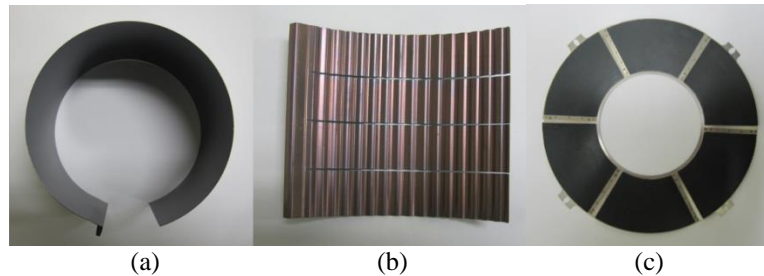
Gas Foil Bearing: Journal Bearing (Top Foil: a, Bump Foil: b) and Thrust Bearing (c)
